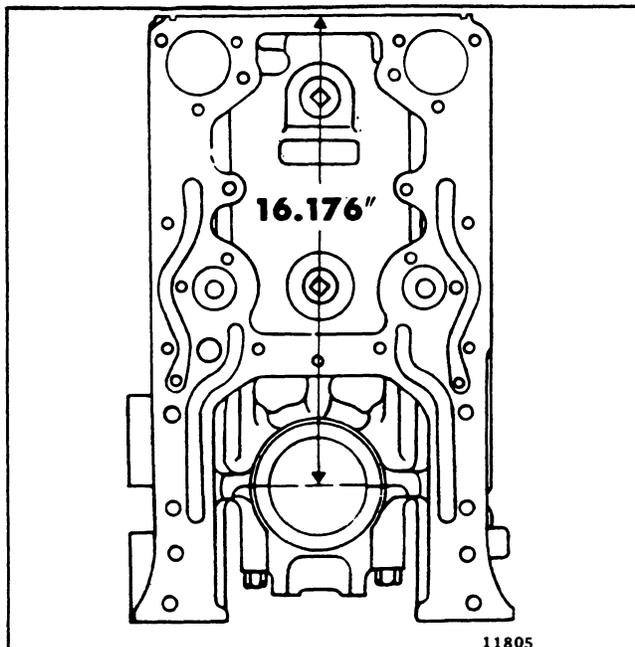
Minimum Distance from Center Line of Crankshaft to Top of Cylinder Block
